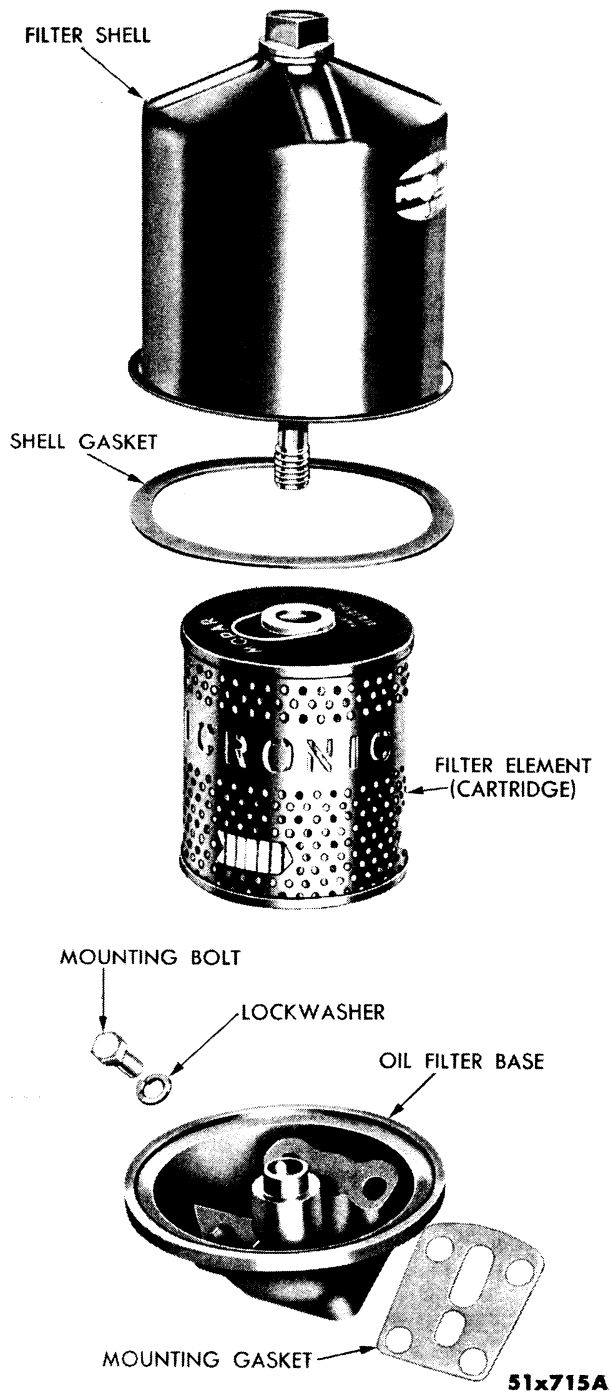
Full Flow Type Oil Filter (Disassembled View)
